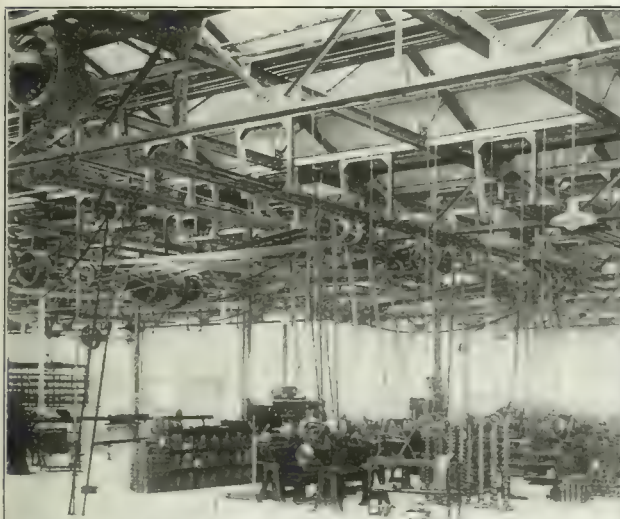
The Turbine Lathe Department, Showing Group Metal Drive.
